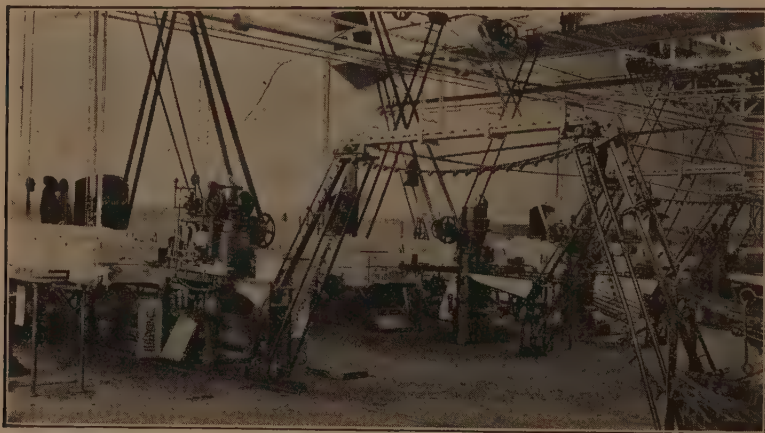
Overhead can conveyor from sealers to sterilizers. (Courtesy, H. G. Prince Cannery, California).
